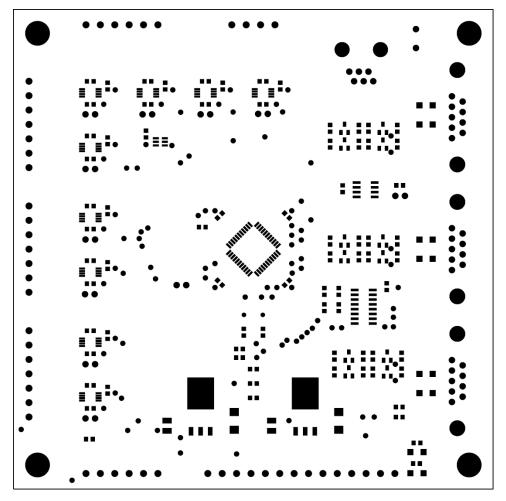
PCB Top Solder Mask (Scale = 1:1)
